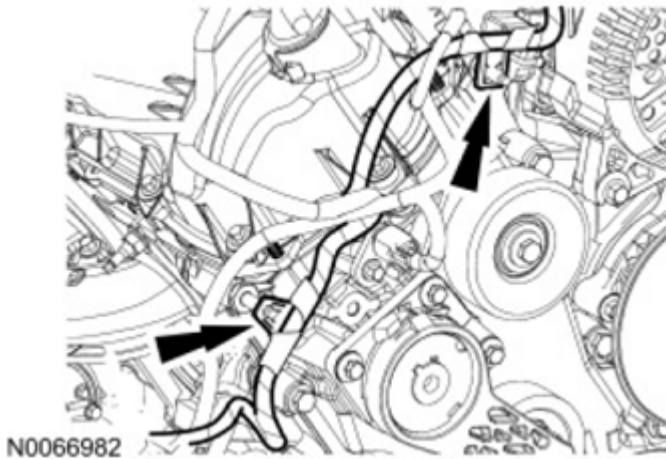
Locating Generator Wiring Harness Position Retainers And Engine Front Cover Studs
